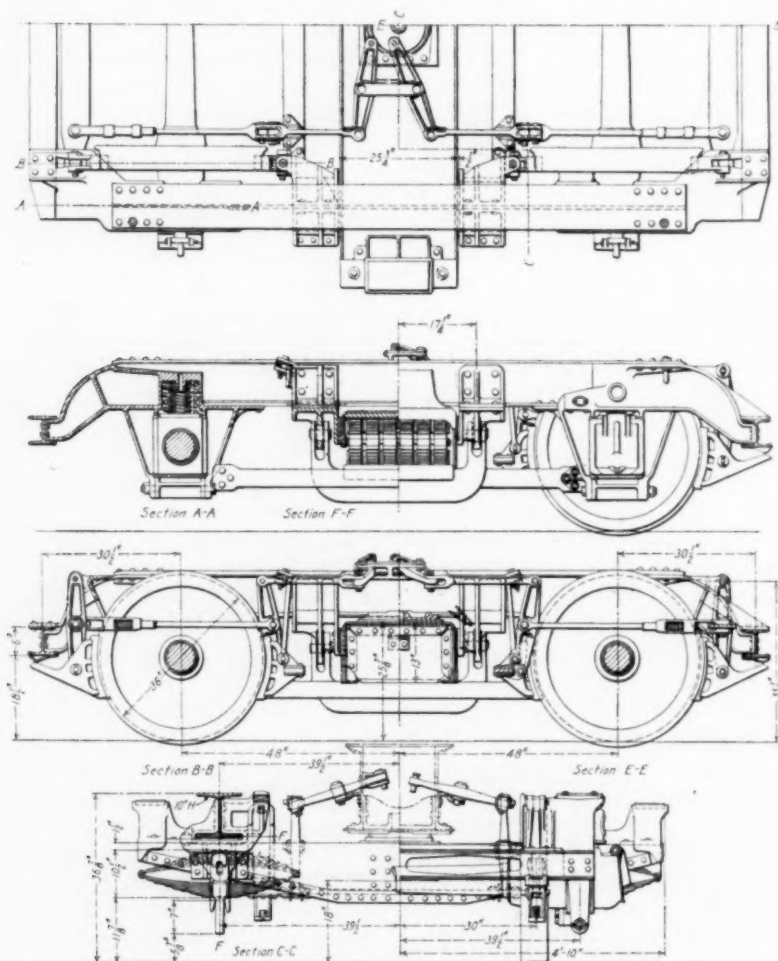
PRESENT STANDARD FOUR-WHEEL STEEL PASSENGER CAR TRUCK; PENNSYLVANIA RAILROAD
